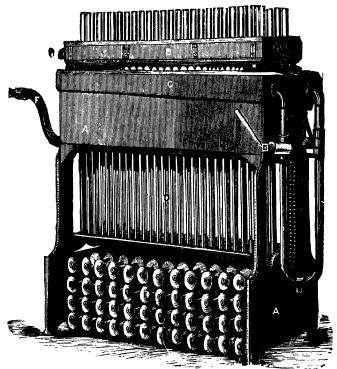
Candle-Moulding Machine (by permission of Messrs. E. Cowles). A, main body of the stand; B, movable clamps with tip bars; C, handle of the eccentric wedge; D, the pistons, having the tip moulds at the upper ends, which exactly fit the lower end of the main moulds; E, the spools, having pins on which the spools revolve; F, the crank for raising the pistons.
